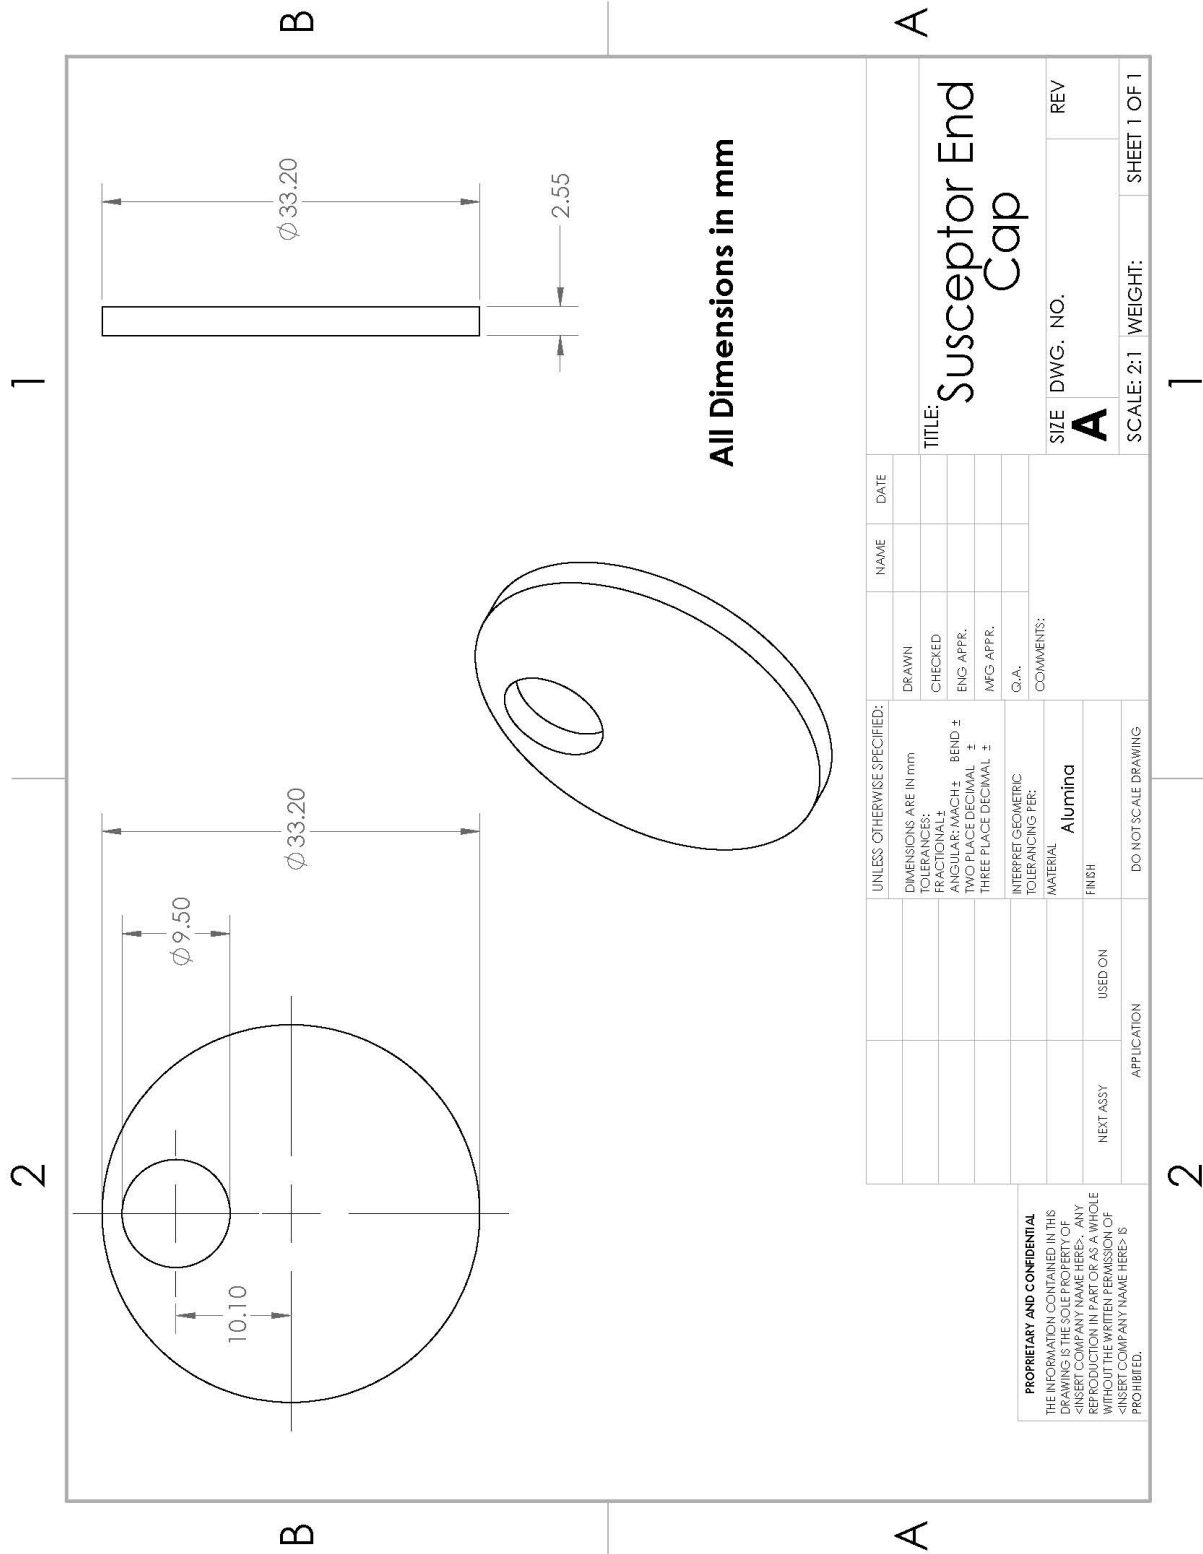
Susceptor – Steam Tube End Cap Drawing
